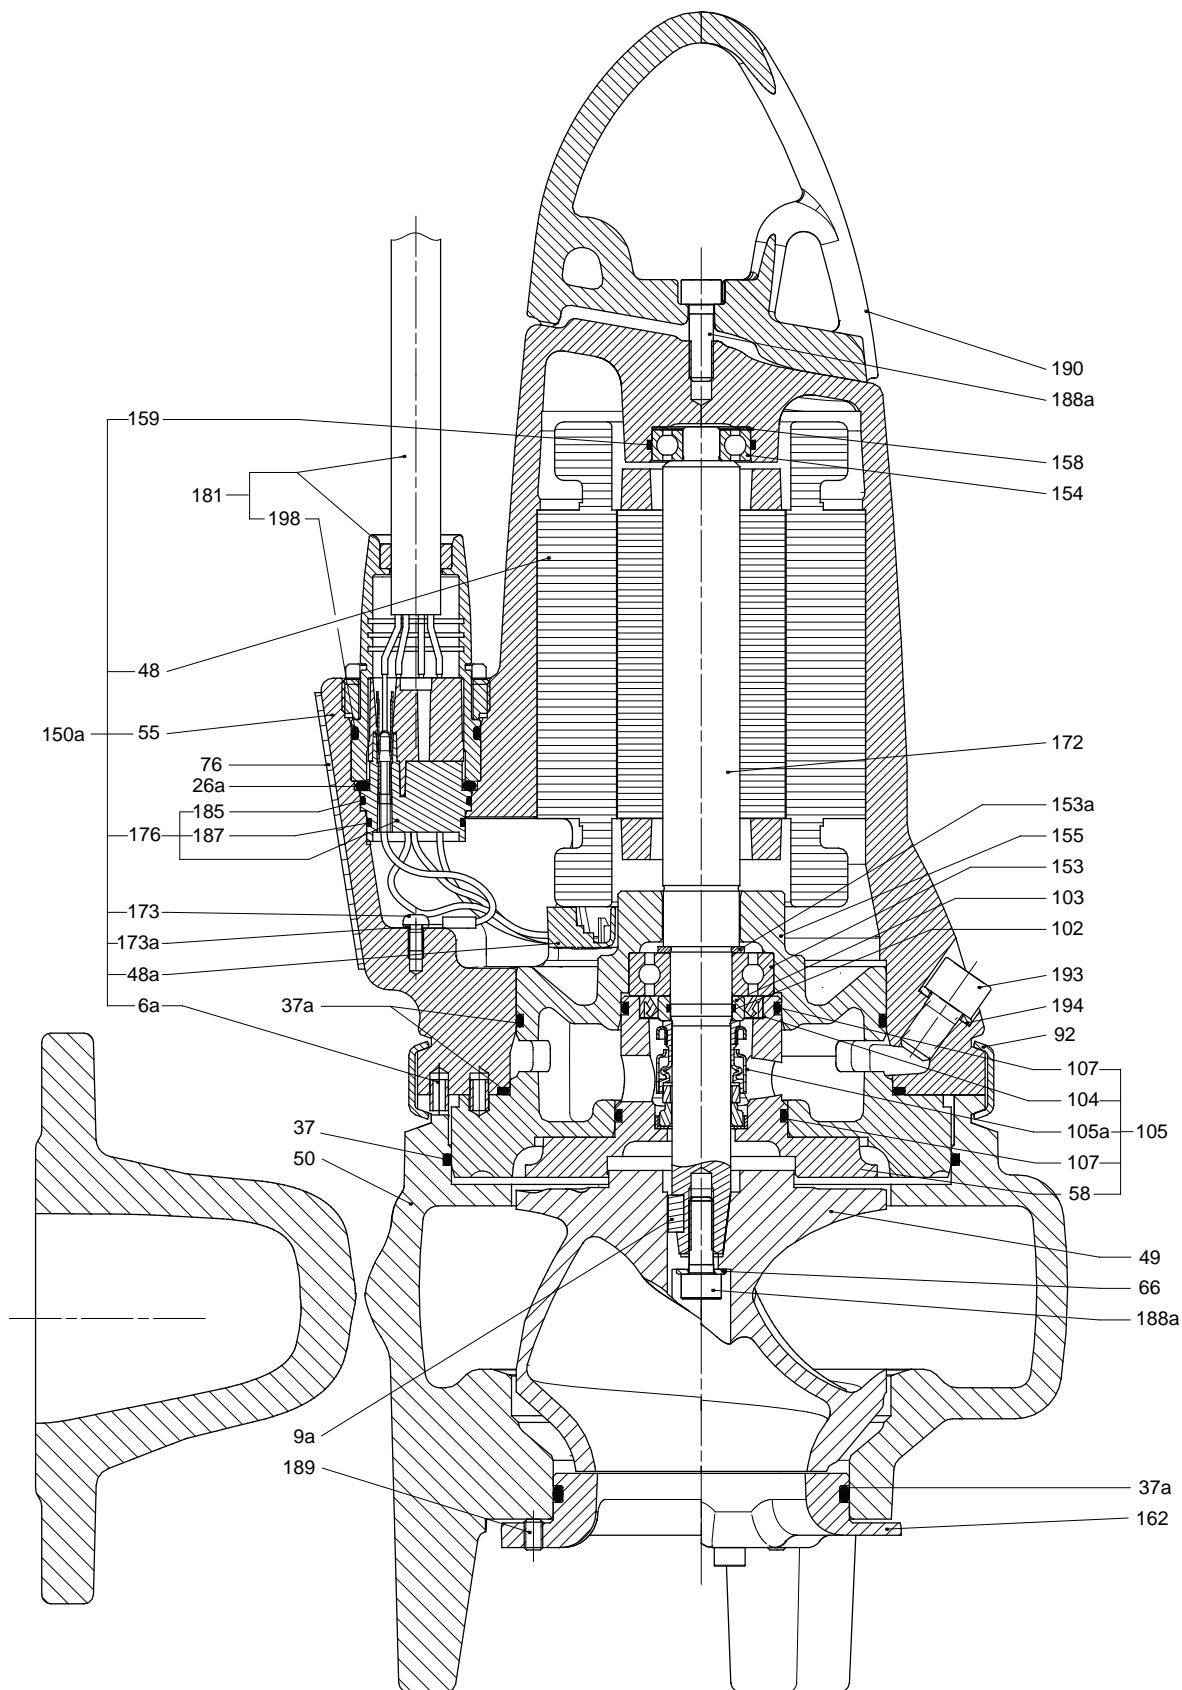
Sectional drawing, SL1.50.65.09/11/15
